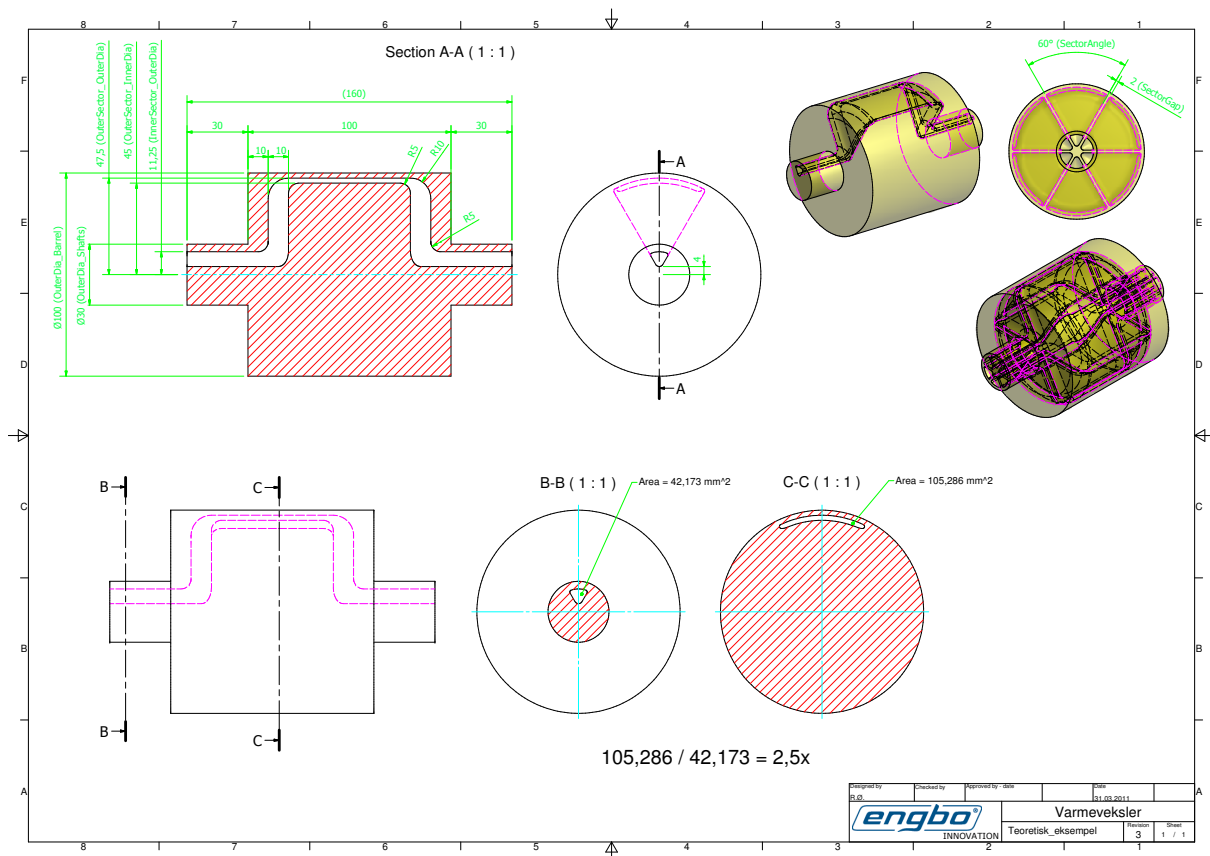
A concept design of the rotating heat exchanger. In this initial design only one channel is present.
